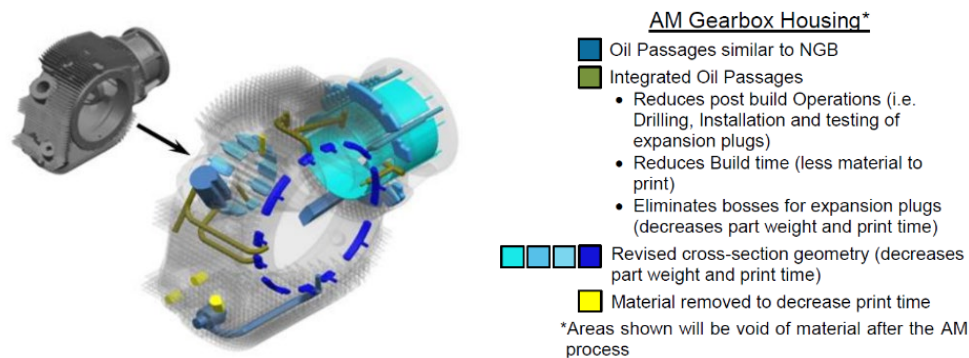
AM gearbox redesign with integrated oil passages and revised geometry to reduce weight.¹³
